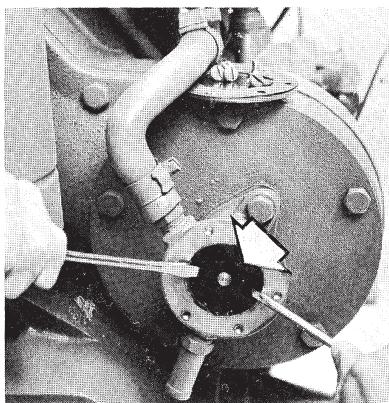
Removing impeller. Arrow points to impeller lock bolt
